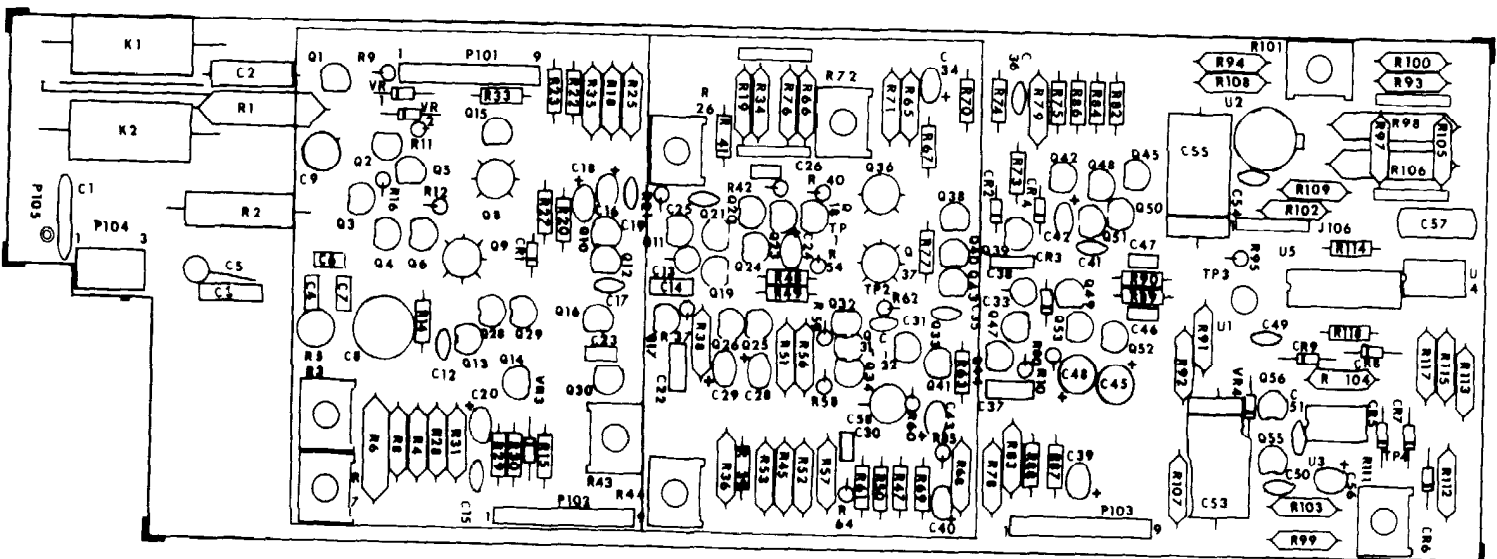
A2 8920A/8921A AC PCB Assembly
